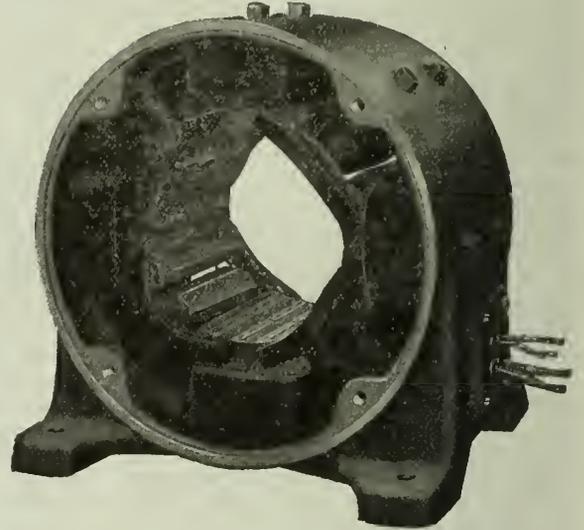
MAGNET FRAME SHOWING CONSTRUCTION AND ARRANGEMENT OF POLE PIECES.
